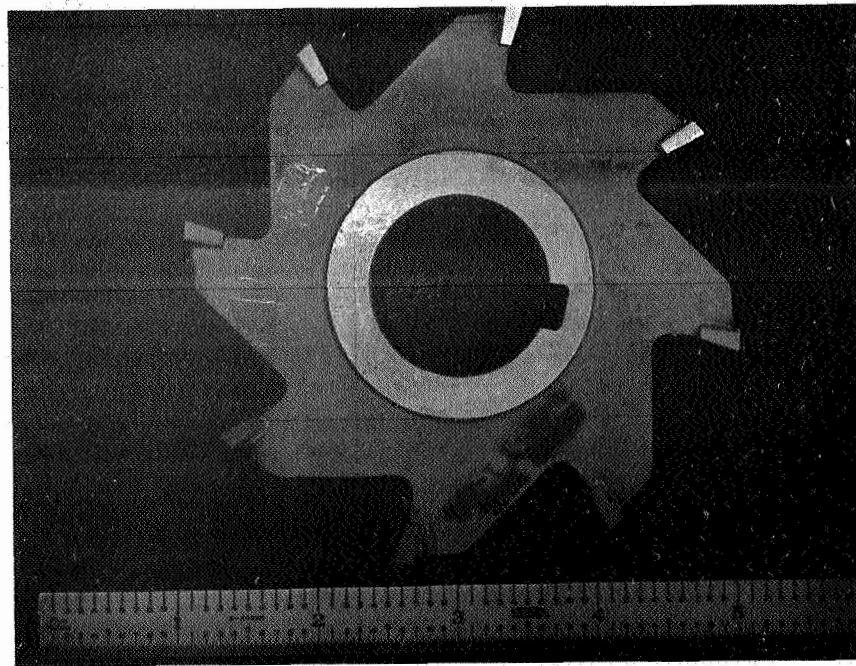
MILLING CUTTER WITH POSITIVE RADIAL RAKE
